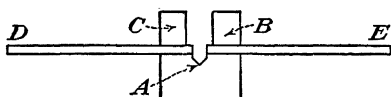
Method of drawing heat from plates during welding. *A*, vee to allow for penetration bead; *B, C*, chill bars; *D, E*, plates to be welded.
